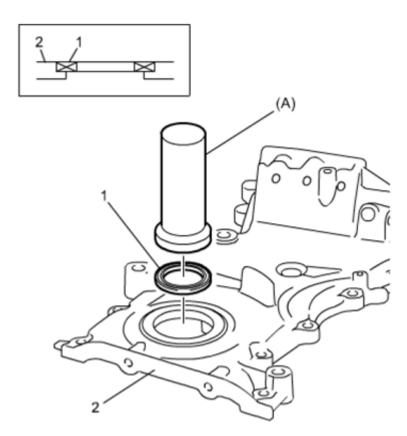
Identifying Oil Seal With Special Tool Courtesy of SUZUKI OF AMERICA CORP.
